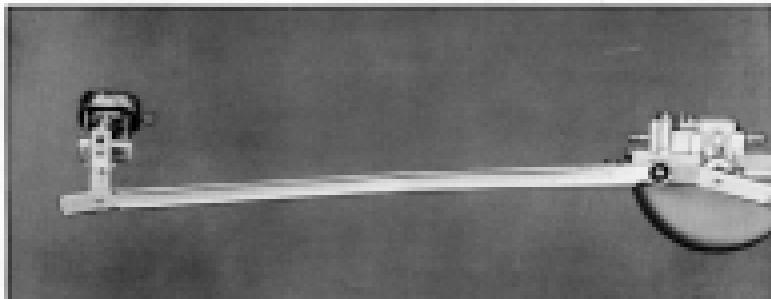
Windshield Wiper Transmission and Motor Layout—'78 and '81 Series
